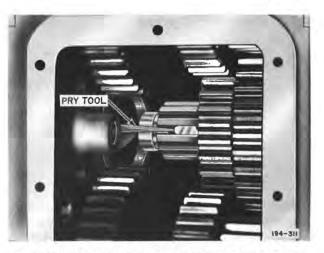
Removing Fourth Speed Gear Thrust Washer Key
